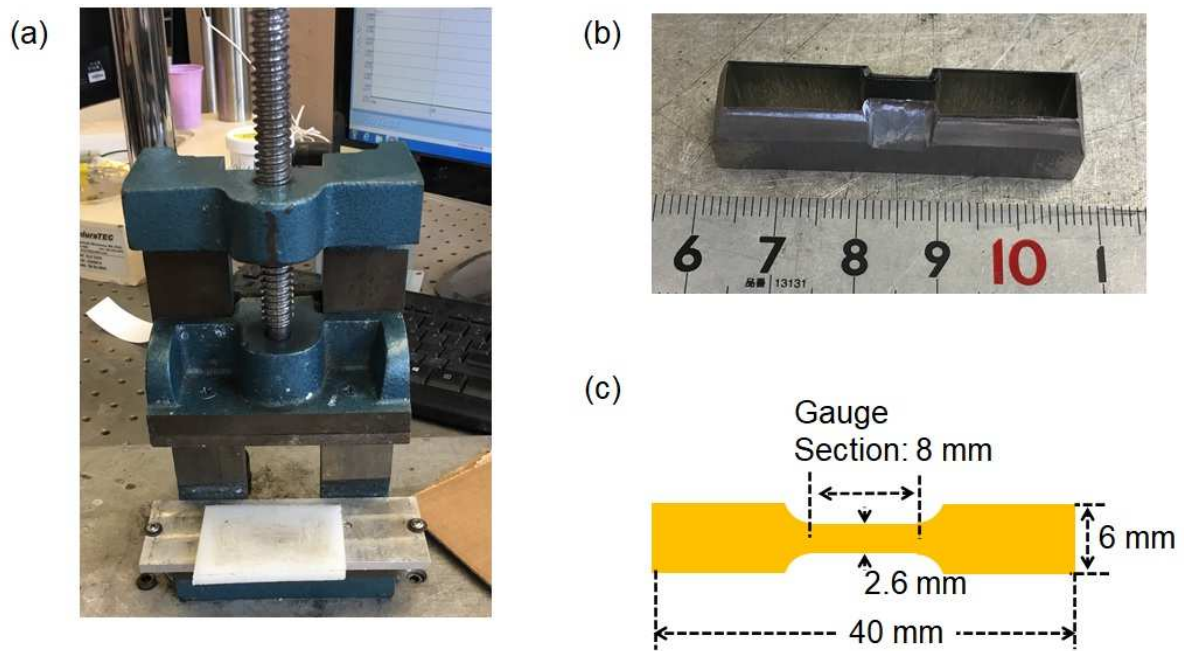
Stamping tools for dog-bone shape sample. (a) hand stamping tool (b) dog-bone shape mold (c) dimension of the dog-bone samples
